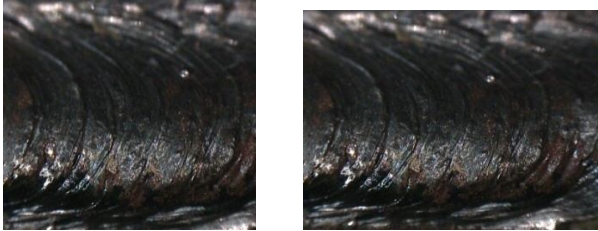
Image of Good Weld Fig.4 Image of Excess Weld
